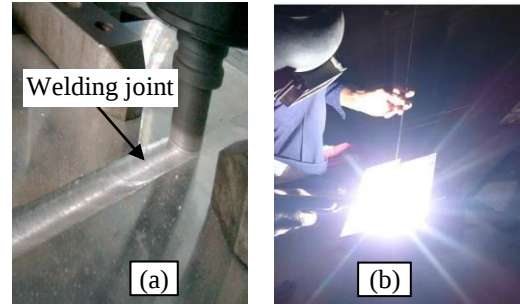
Process of FSW (a) and TIG weld (b).
